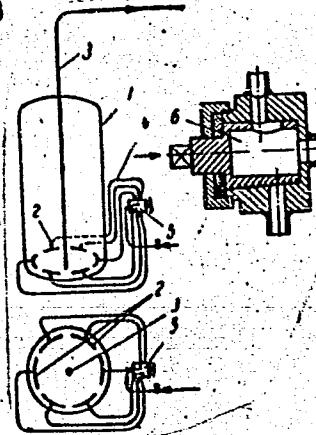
1 - cylindrical chamber; 2 - sectors of porous duct; 3 - inlet end of material duct; 4 - inlet tube; 5 - common compressed air distributor; 6 - plug.
